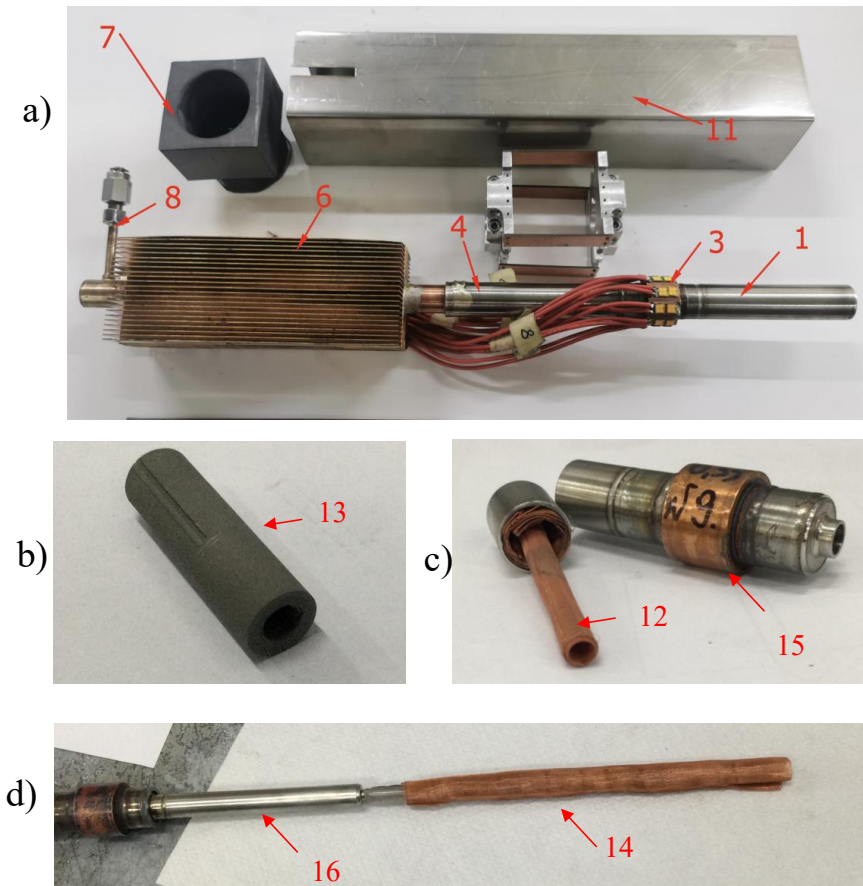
(a) Structural elements of the luminaire prior to assembly. (b-d) Structural components of the HLP prior to assembly. 13 – primary evaporator wick; 12 – secondary evaporator wick; 15 – assembled evaporator; 14 – condenser capillary structure; 16 – liquid return line within the vacuum envelope.
